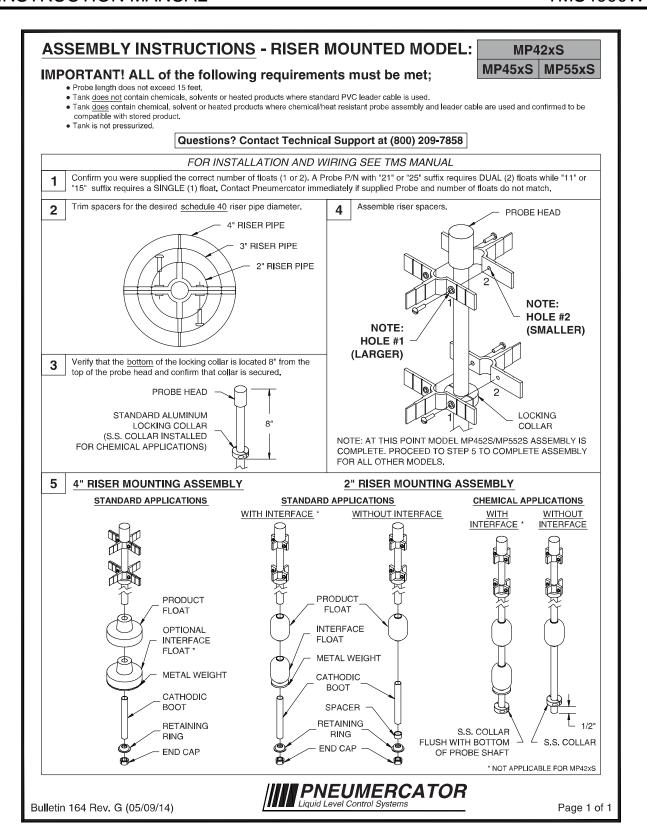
MP55xS Probe Assembly Instructions - Riser Mount
